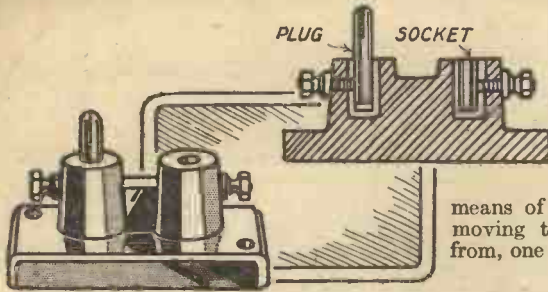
A coil holder for baseboard mounting also sectional drawing of the holder.
